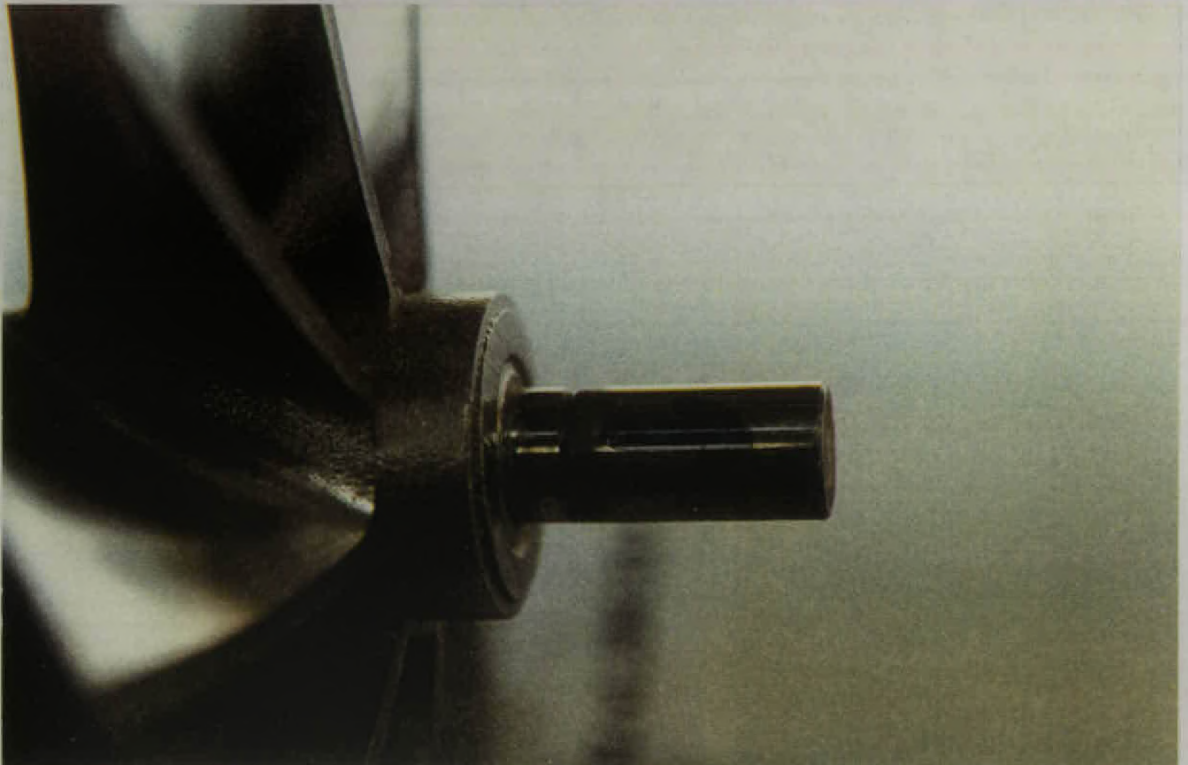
MANUFACTURER B. 100 mm DIAMETER METER, ROTOR SHAFT WEAR
